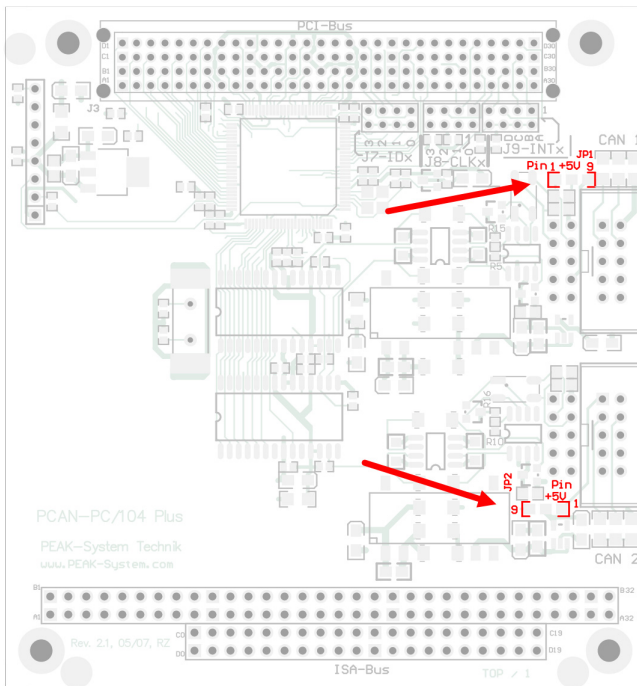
Positions of the solder fields on the PCAN-PC/104-Plus card for a 5-Volt supply (JP1 upper position, JP2 lower position)
